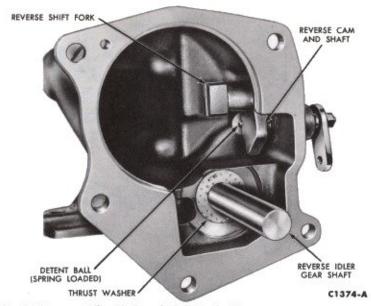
Reverse Idler Shaft and Shift Mechanism
